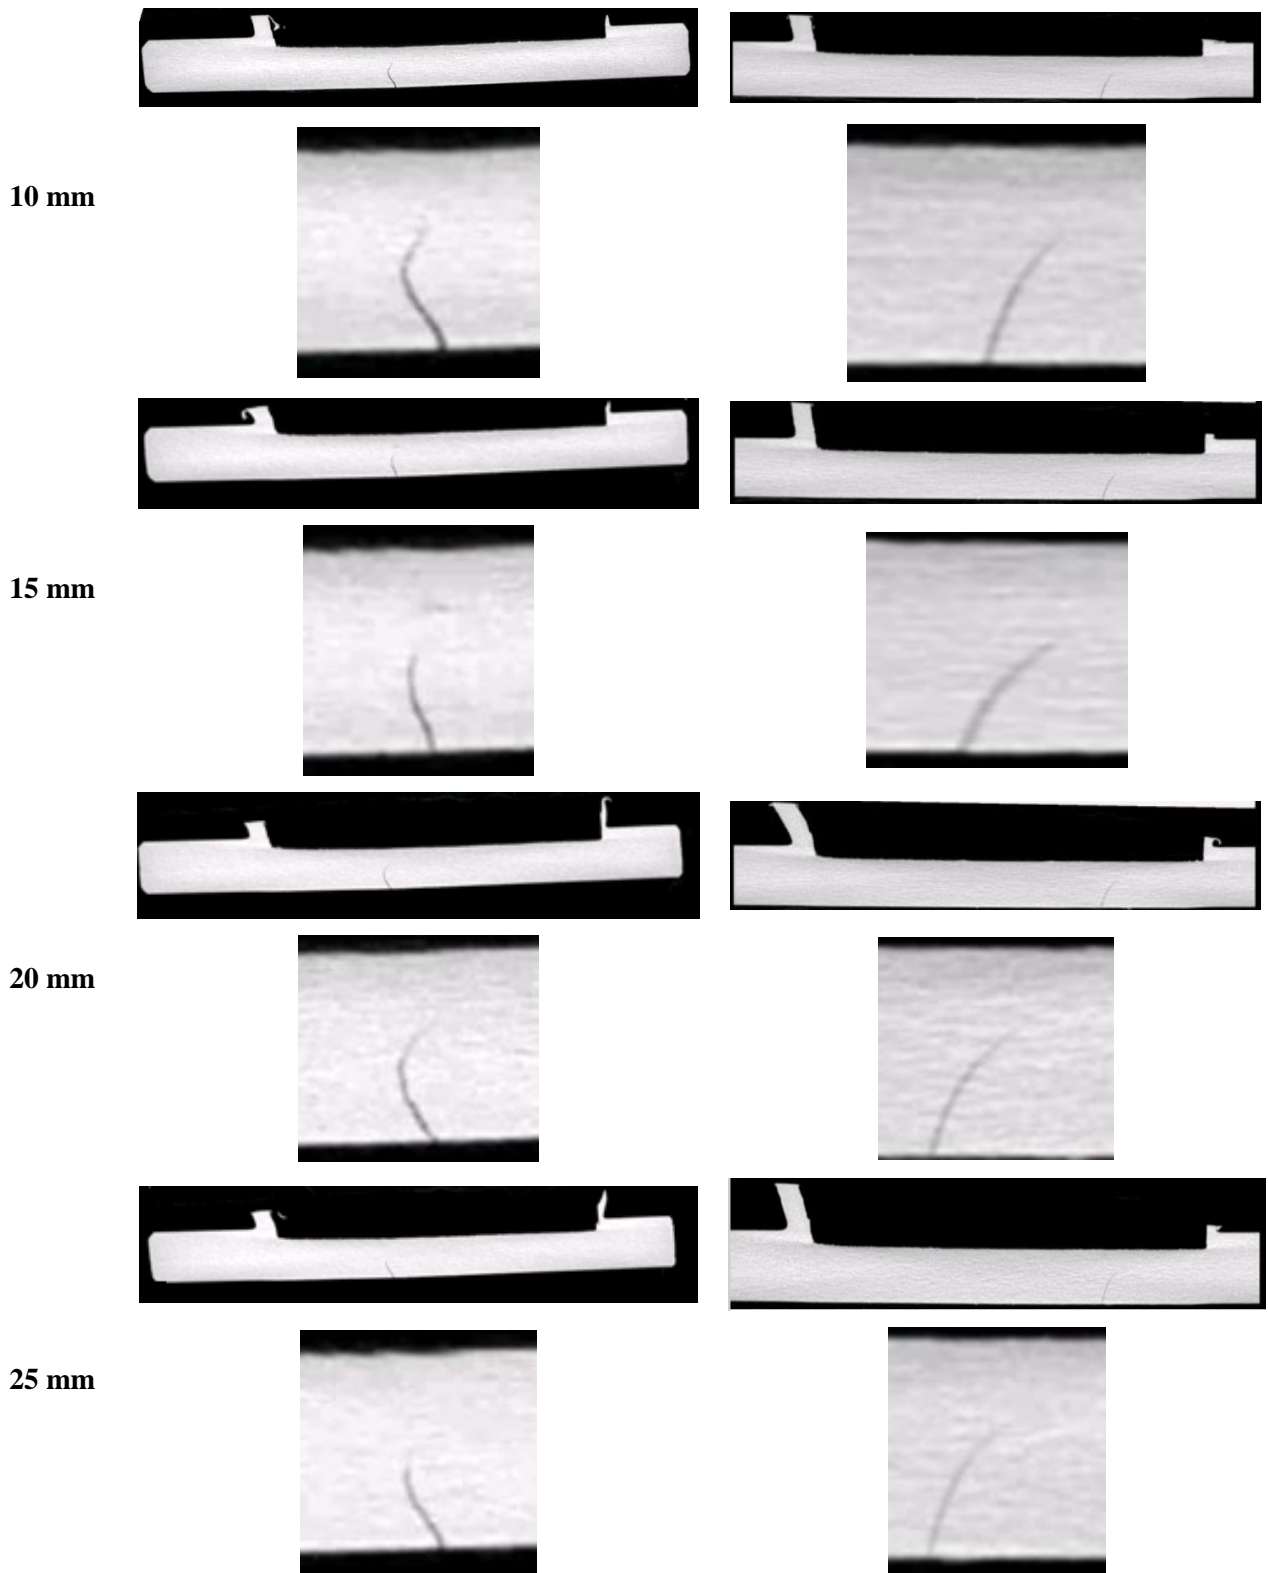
Constancy of Lack of Penetration Defects through the Length of Welds
